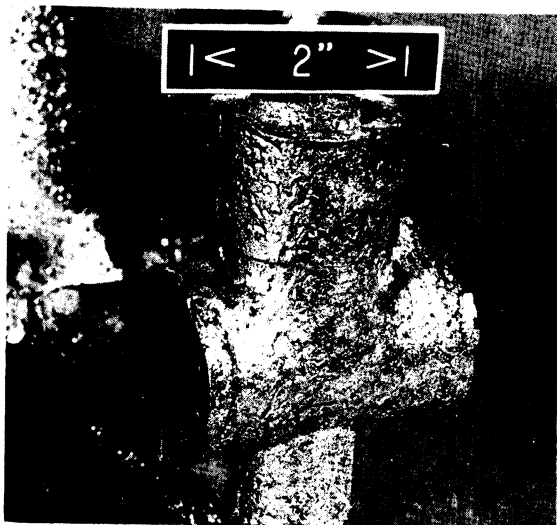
Molybdenum pipe tee, cast in machined graphite.
